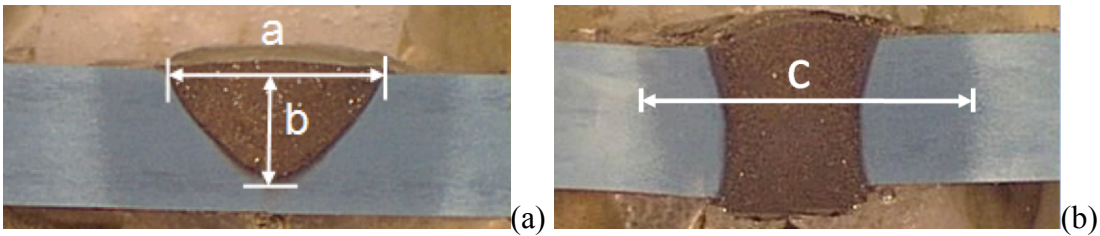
Weld macrograph for (a) argon (showing measurements for weld width and depth), and (b) alternating at 7.5 Hz (showing measurement for the HAZ width)
